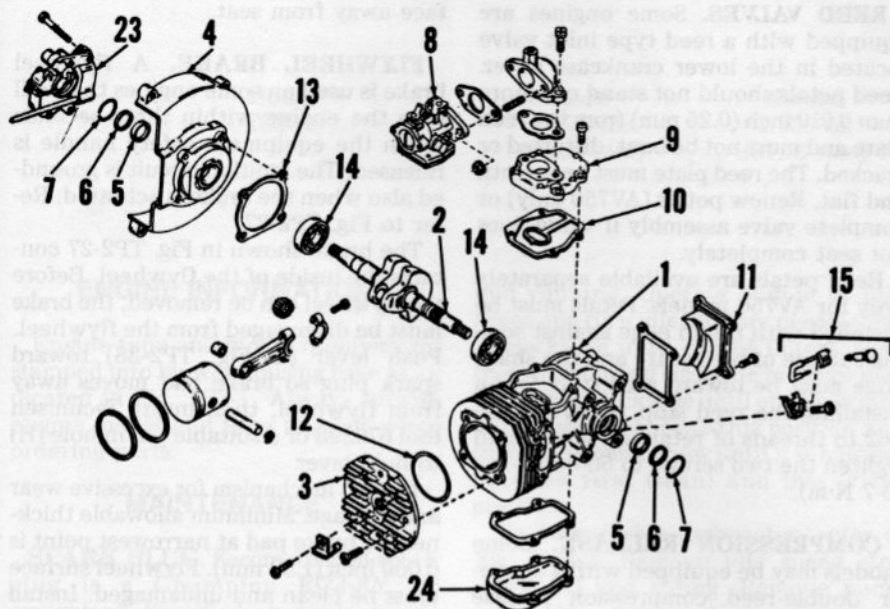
Exploded view of AH750 engine. Compression release is shown at (15). Model AH817 engines are similar.
